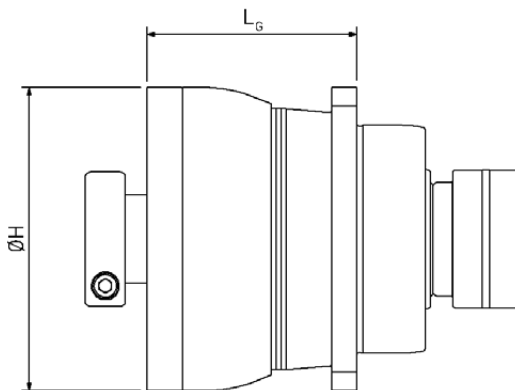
Gearbox for bridge axes HB-R and cantilever axes HC-R
